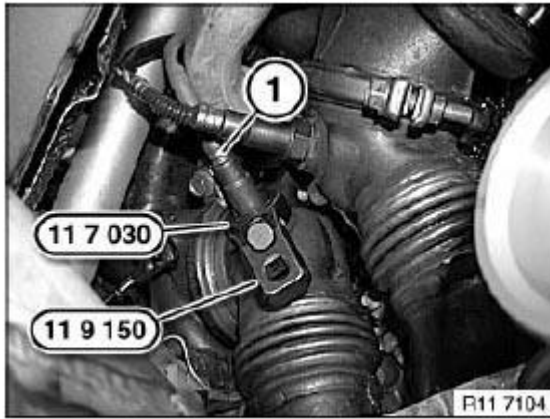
Releasing Oxygen Control Sensor Using Special Tools 11 7 030 And 11 9 150
